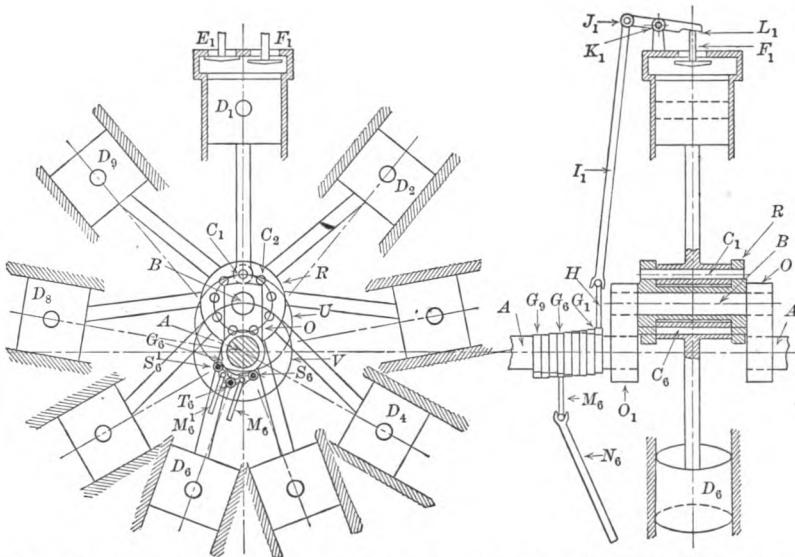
SALMSON FIXED RADIAL TYPE OF AERONAUTICAL ENGINE, DIAGRAMMATIC END VIEW
